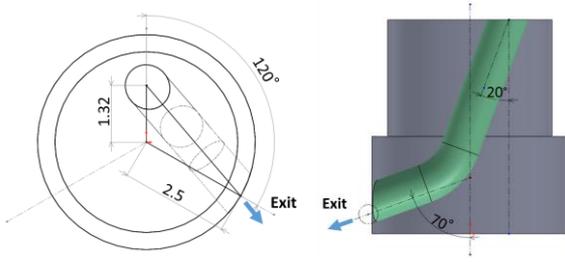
Extrusion route (Left: bottom view, Right: side view)
